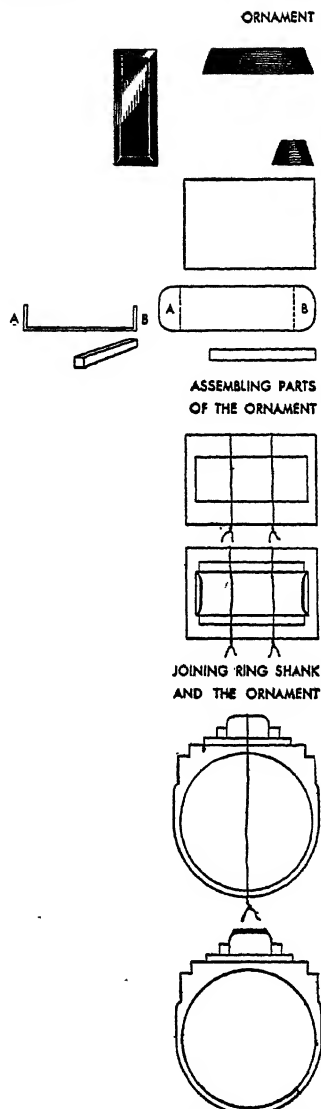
Shaped and pierced metal shank with oblong stone, metal plate, and wire units
